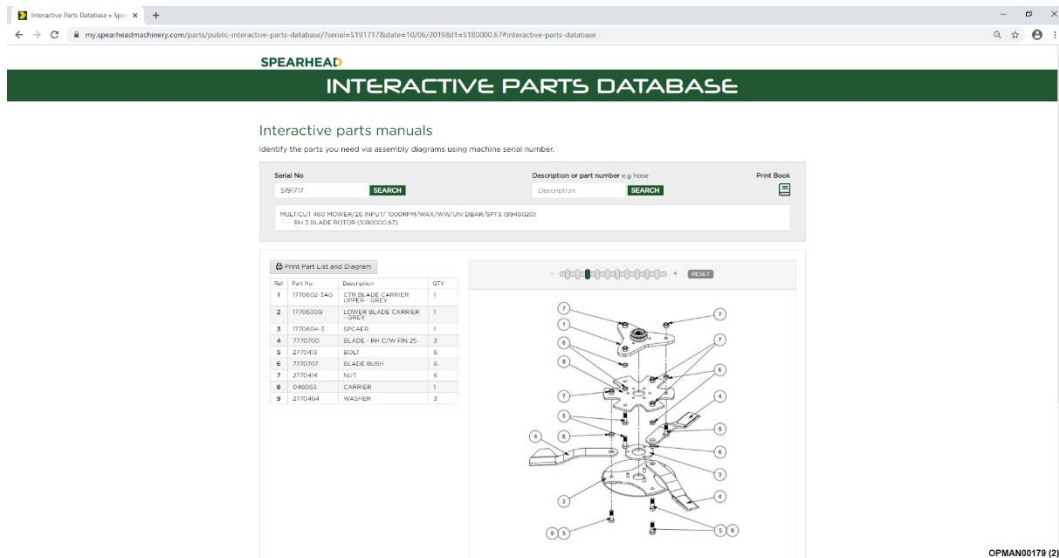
Exploded Parts Breakdown With Bill Of Materials
